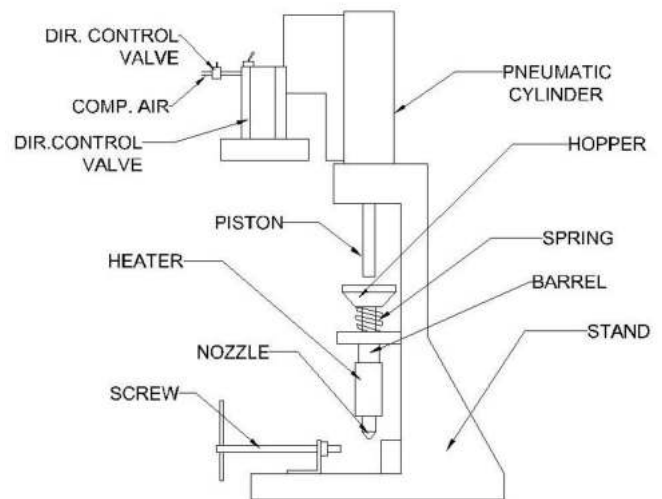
Pneumatic Injection Plastic Molding Machine.
